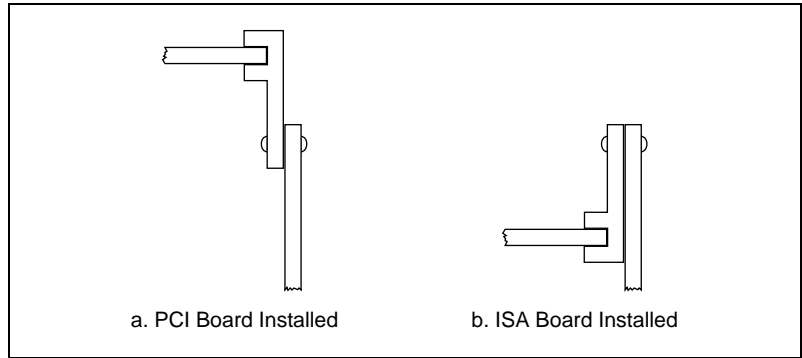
PCI Board and ISA Board Installed in a VXIpc-872
